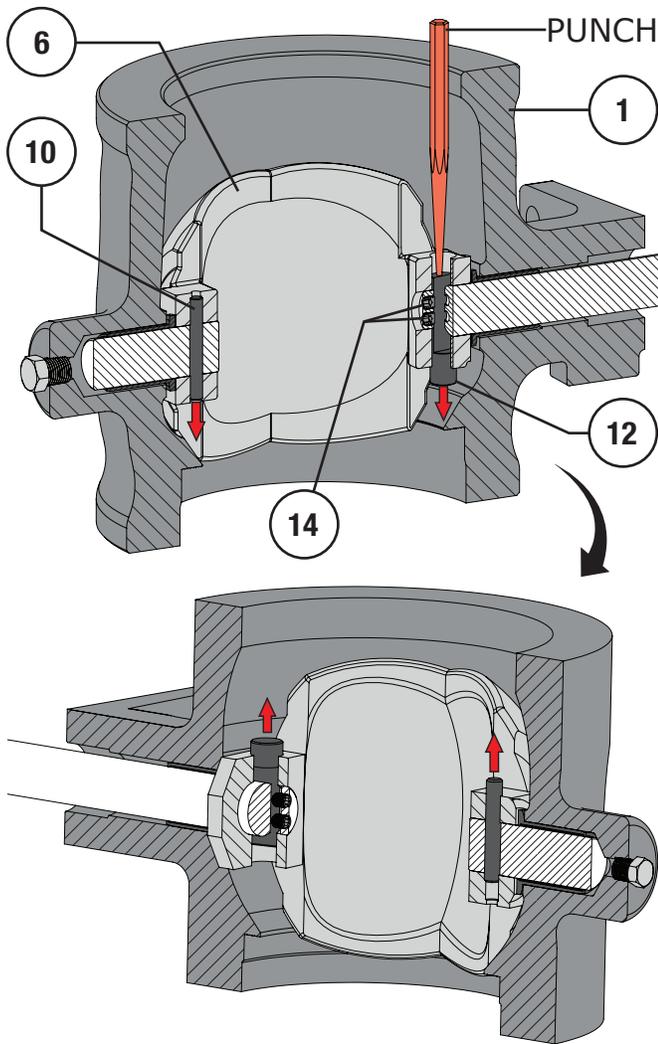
1 & 1-1/2" NPS Follower Shaft Removal (Obsolete Valve Body Design)
